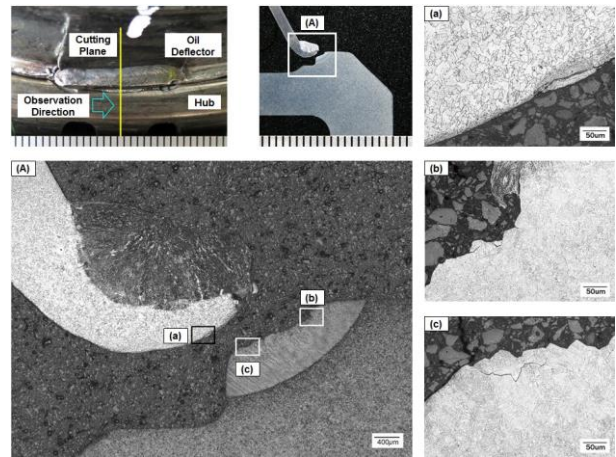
Macroscopic and microscopic observation of the fractured weld bead of the destroyed hub assembly in the range pack of the transmission
